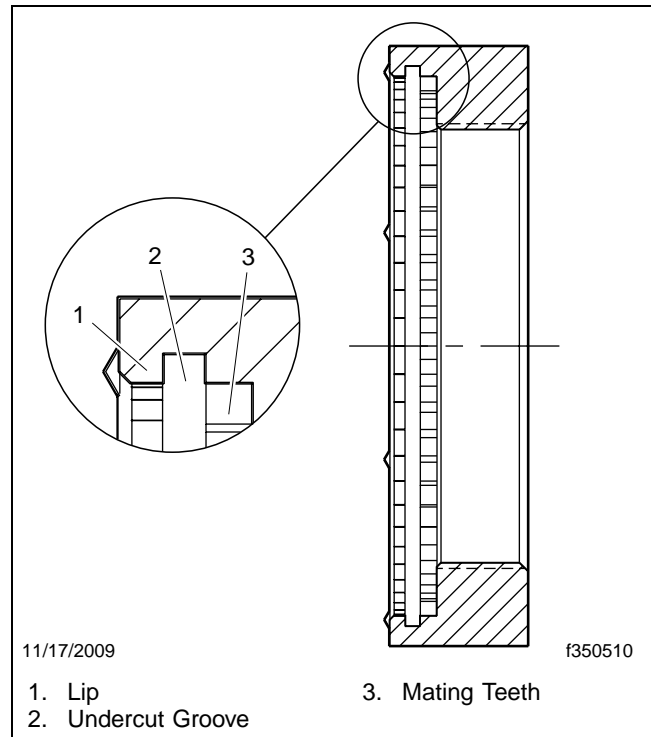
, Pro-Torq Spindle Nut, Cross Section
